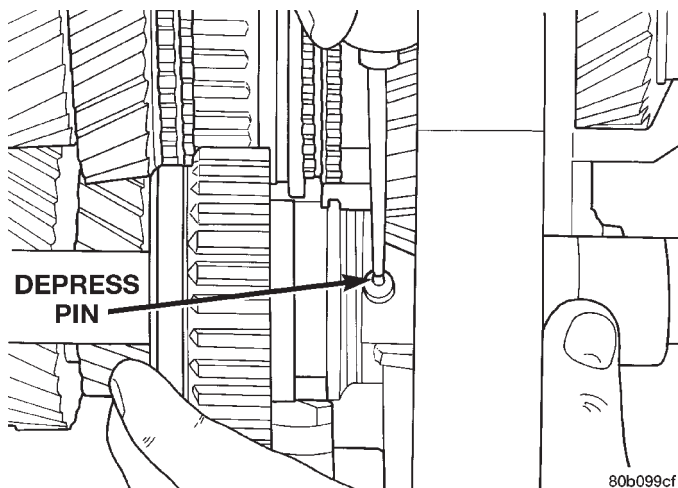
Depress Pin In Reverse Idler Gear Shaft
